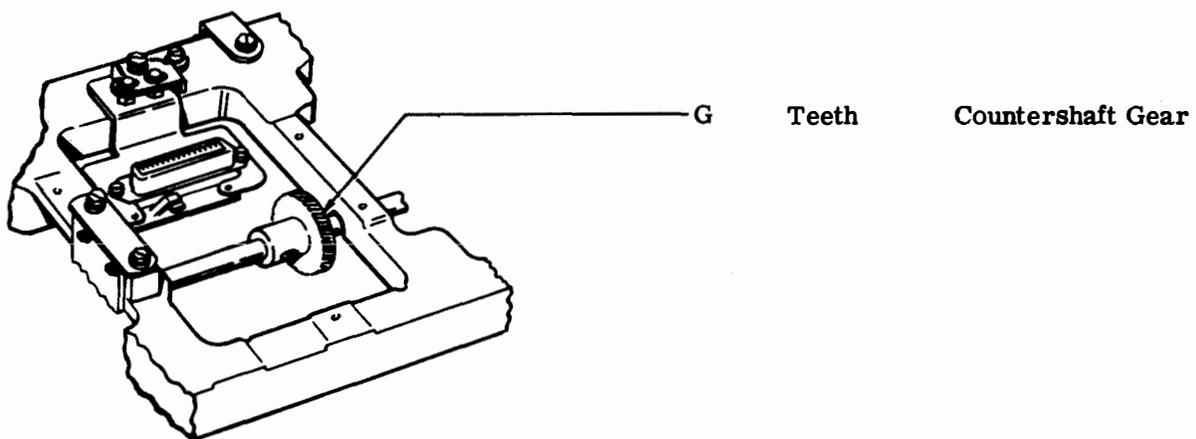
Countershaft Gear - Single Contact Multiple Mounting Bases (Common Speed)
